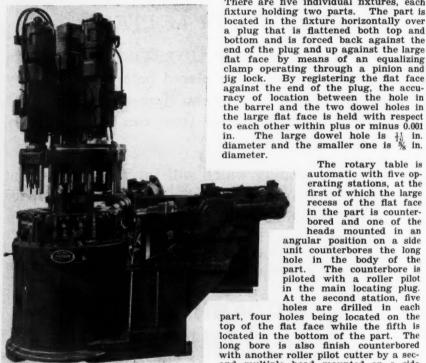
Ex-Cell-O Semi-Automatic Gear Case Machine.
